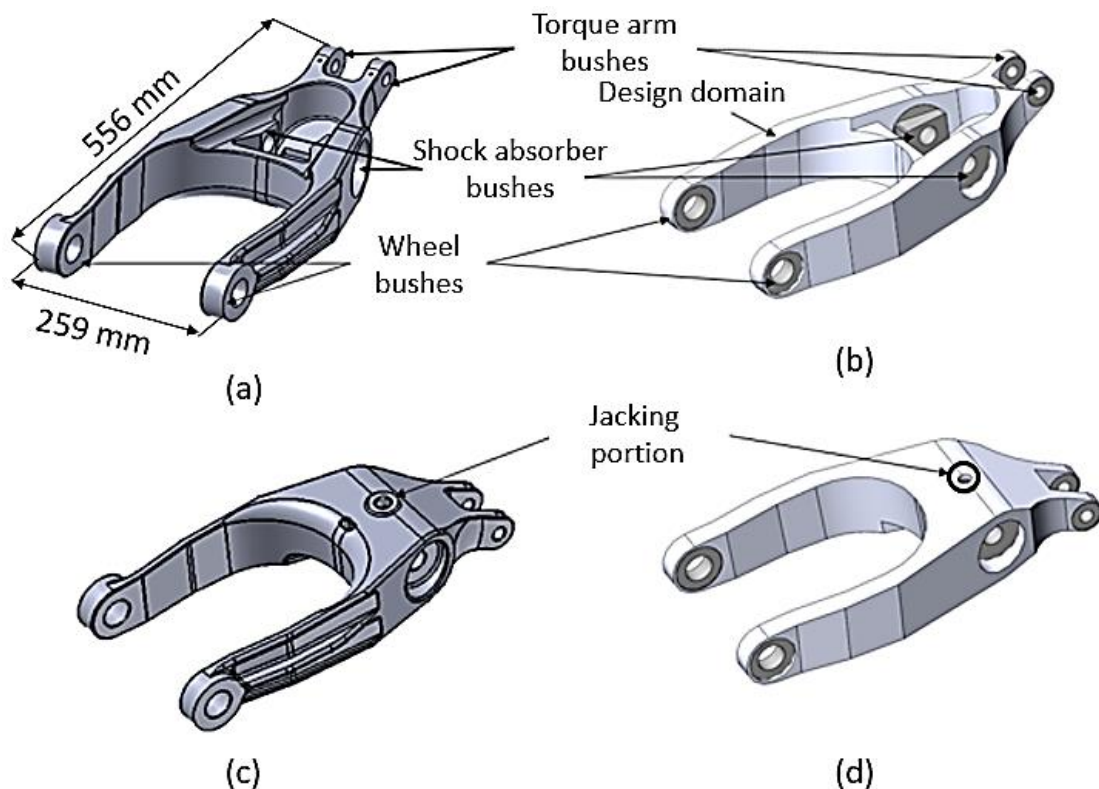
CAD model of the nose wheel fork (a) top view of the actual fork, (b) top view of design domain, (c) bottom view of the actual fork, and (d) bottom view of the design domain CAD model
